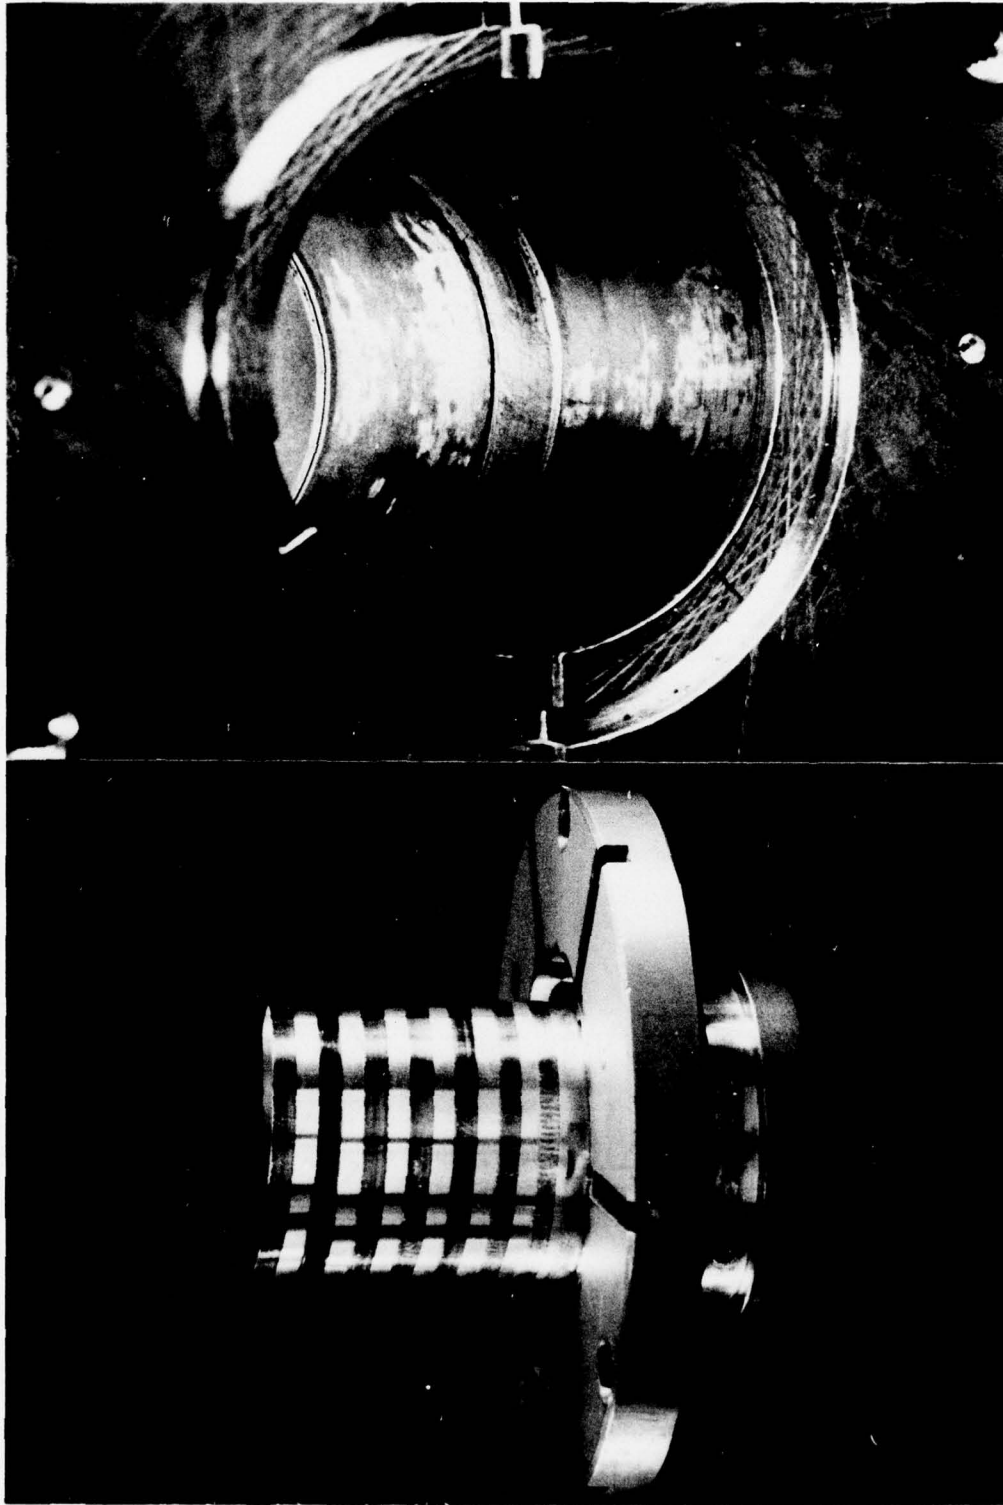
JOURNAL FOIL-BEARING LLF-1J. - FOIL TELESOPED OUT AND COILED IN RETAINER
